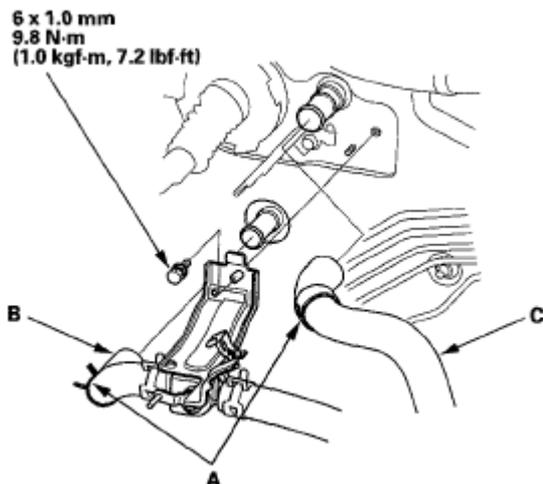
Identifying Outlet & Inlet Heater Hoses And Water Valve Bracket With Torque Specifications
